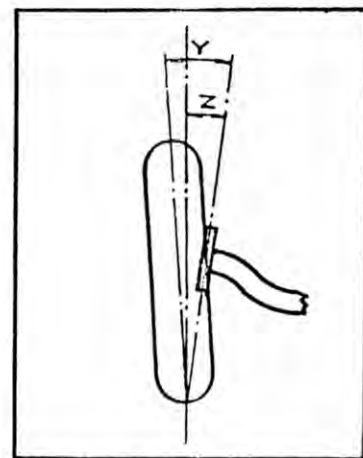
Steering knuckle angle (Y) & king pin angle (Z) determine camber. When top of wheel tilts out as shown, camber is positive.
